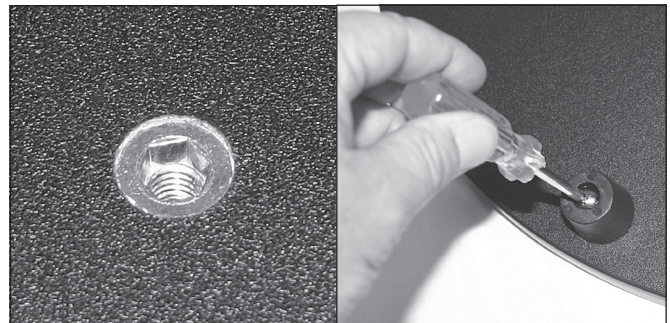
The non-threaded end of the metal insert is nearly flush with the bottom side of the bottom groundplate.
